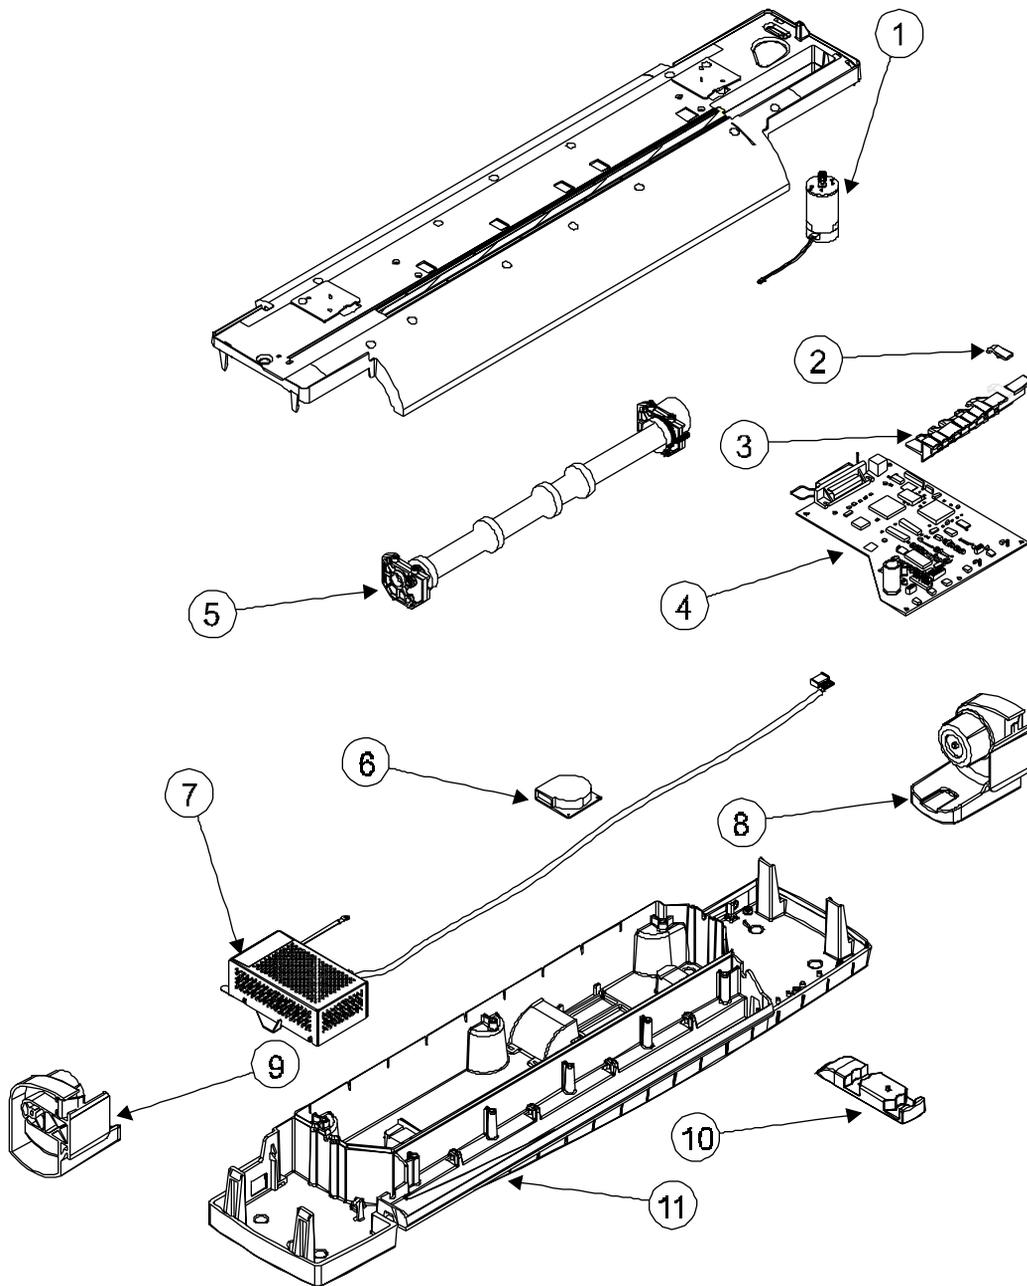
Croma24 Assembly Parts (Below Platen).
